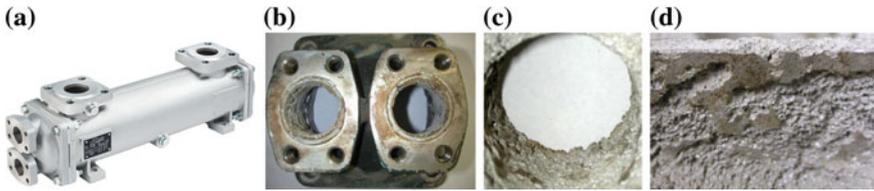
a Oil cooler. b–d Corroded aluminum parts (water inlet)
